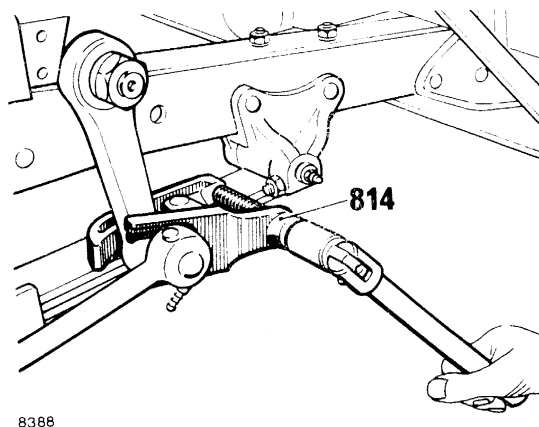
Disconnecting ball joint from drop arm using Remover 814
